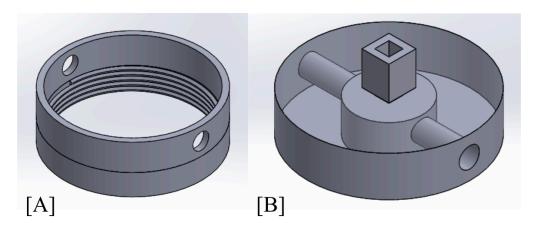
CAD designs for a preliminary magnetic lock. The bottom half (A) included threads to screw onto the bottle, as well as magnet holes. The top half (B) included a top tunnel for the "connecting" magnet, in addition to magnetic tunnels that would house some more of the magnets.
